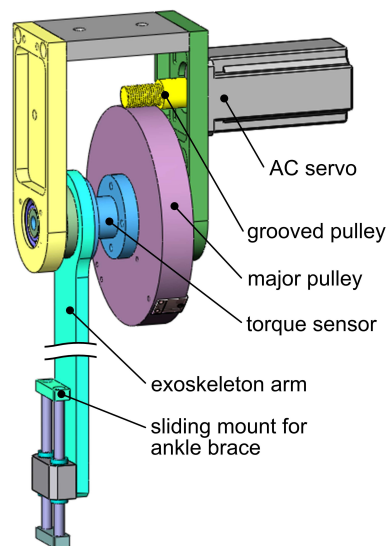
Diagram of the 1-DOF exoskeleton's motor, cable drive and arm assembly.
